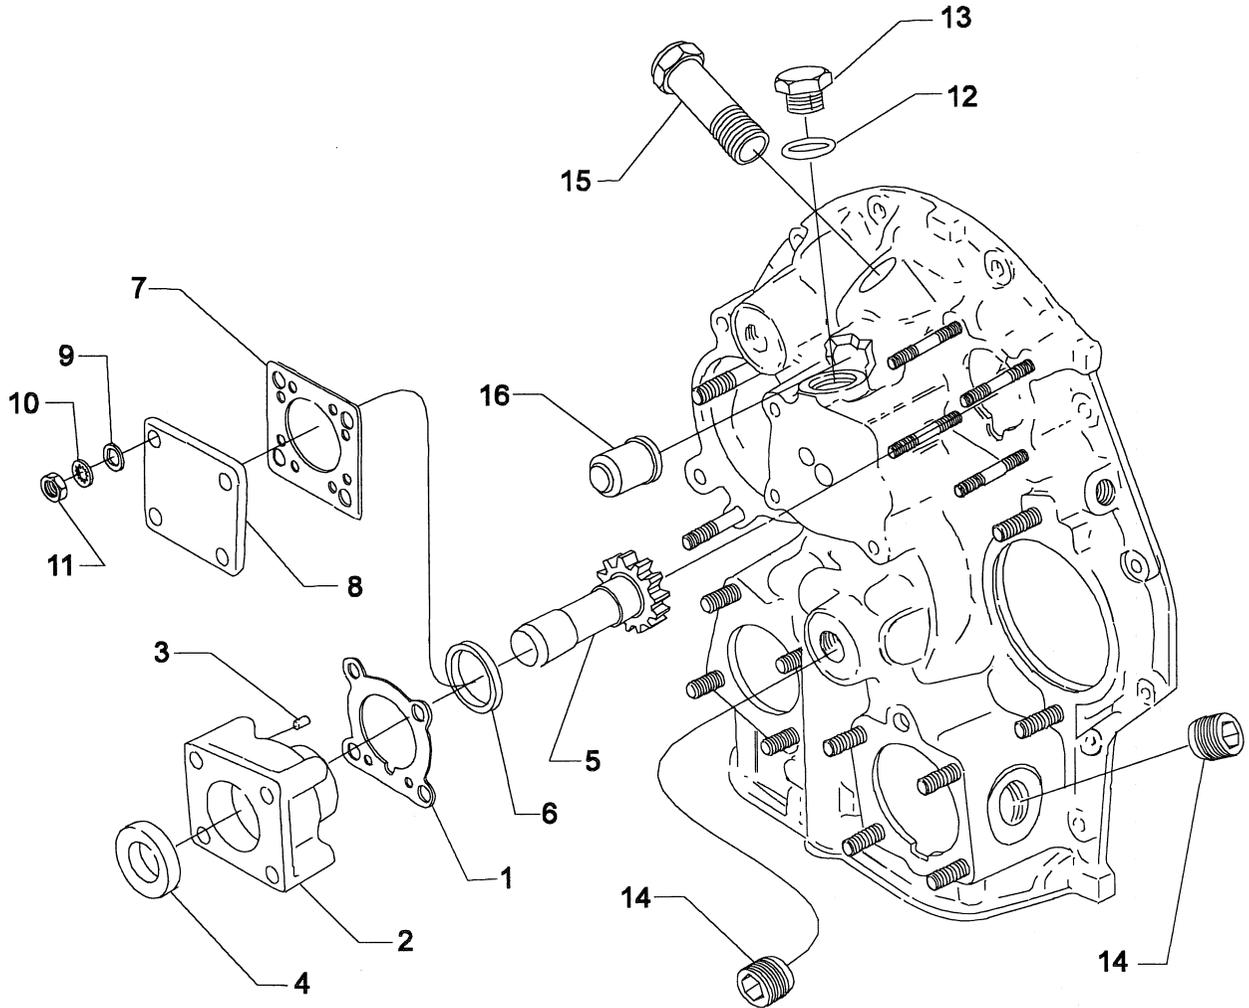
VACUUM PUMP DRIVE, OIL COOLER AND BREATHER FITTINGS
